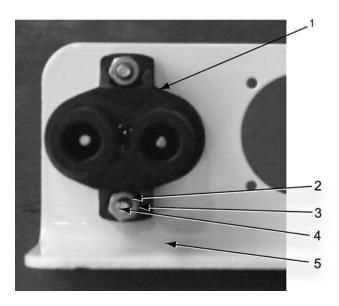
HDC Circuit Breaker Installation, Rear View
